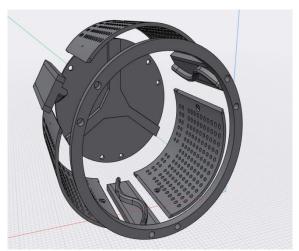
Schematic Diagram of the Drum Parts of the Removable Washing Machine
